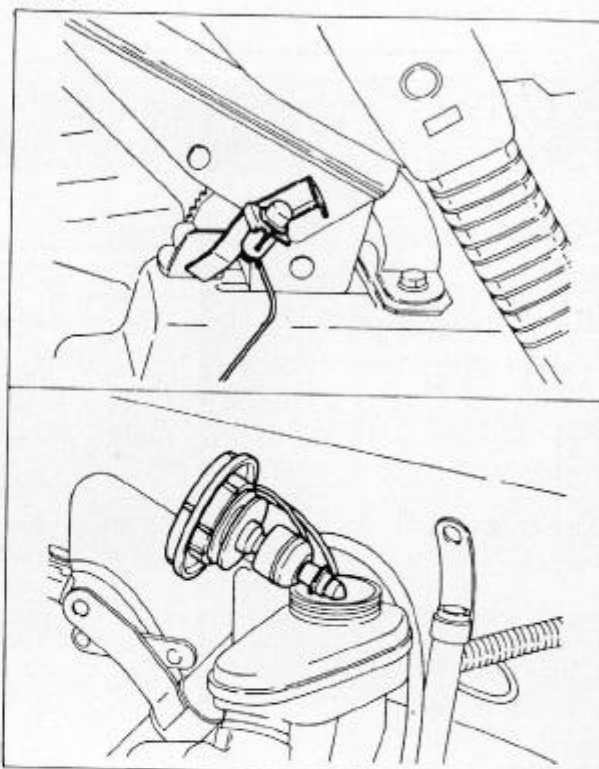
PARKING BRAKE SWITCH POSITION (UPPER), BRAKE LEVEL SWITCH POSITION (BELOW)
